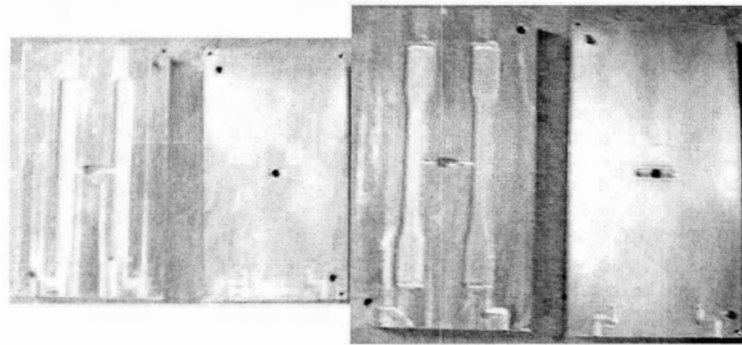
Small Scale Molds: Flexure Mold (left) and Tensile Mold (right)
